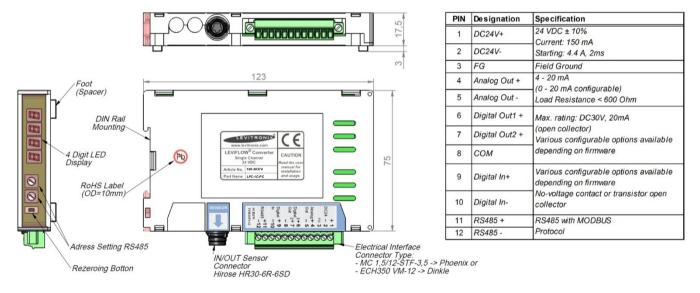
Dimensions and layout of interfaces of single channel converter LFC-1C-PC
